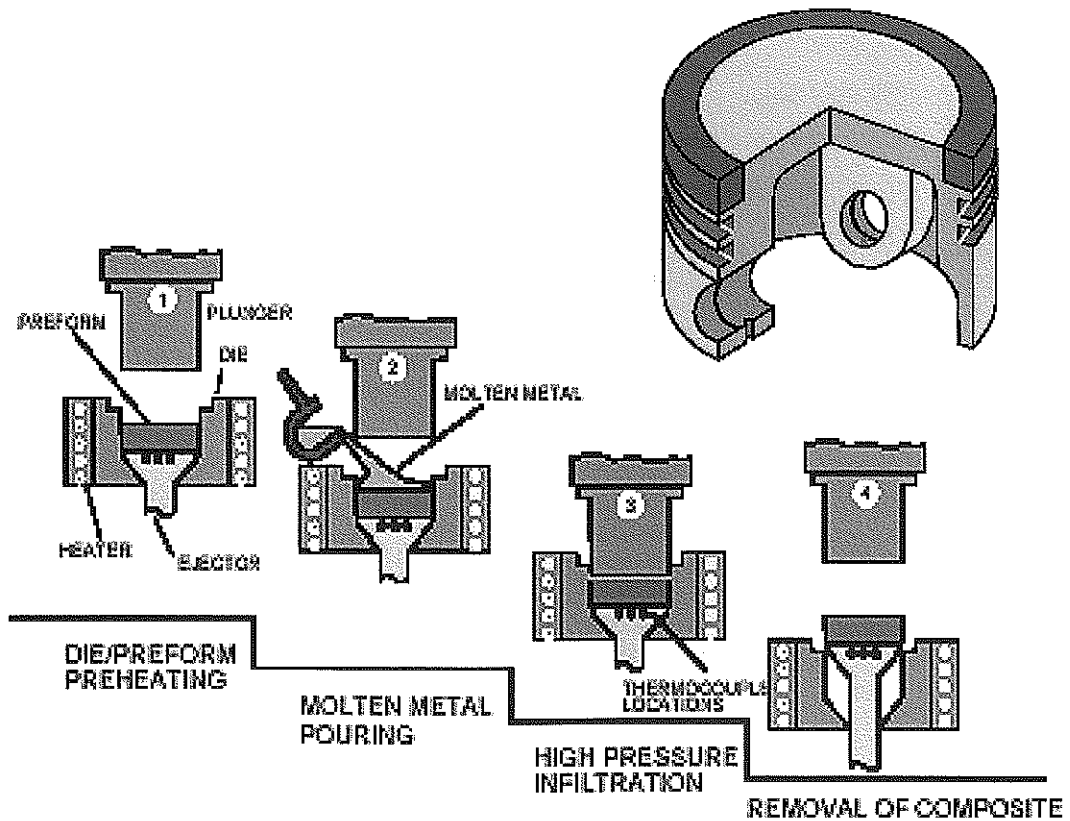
The production of fibre reinforced metal matrix composite diesel engine piston processed by squeeze casting technology.
